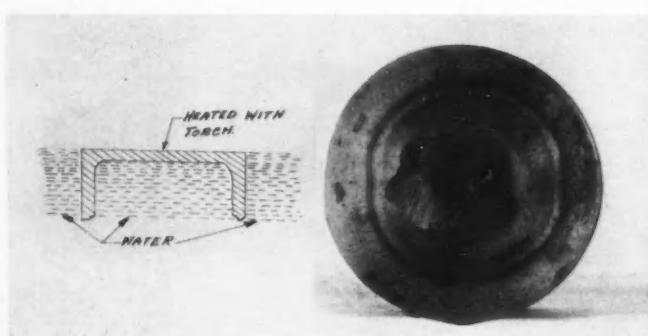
The Conditions Which Cause Cylinder Blocks To Crack Are Illustrated by Heating a Piston Entirely Surrounded by Water
